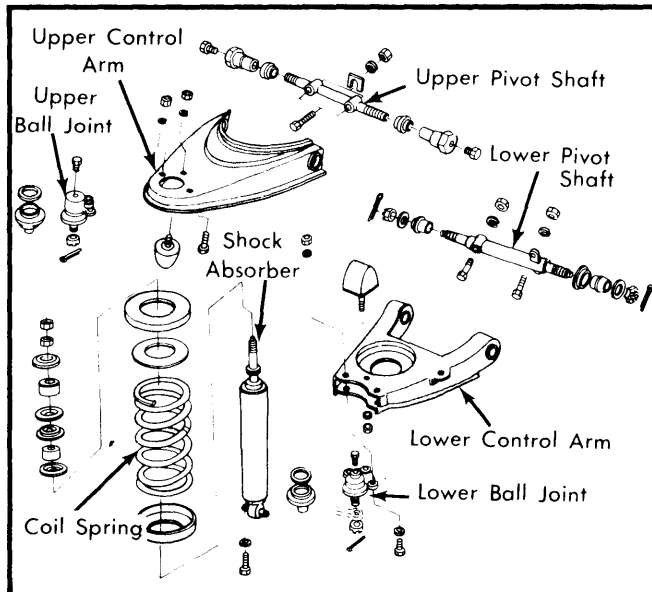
Exploded View of Front Suspension Assembly for Component Identification
